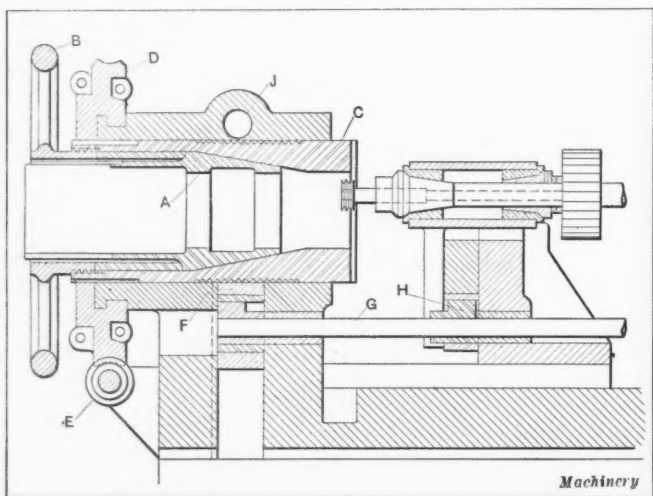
Diagram illustrating General Arrangement of Cutter- and Work-spindles of Thread Milling Machine
